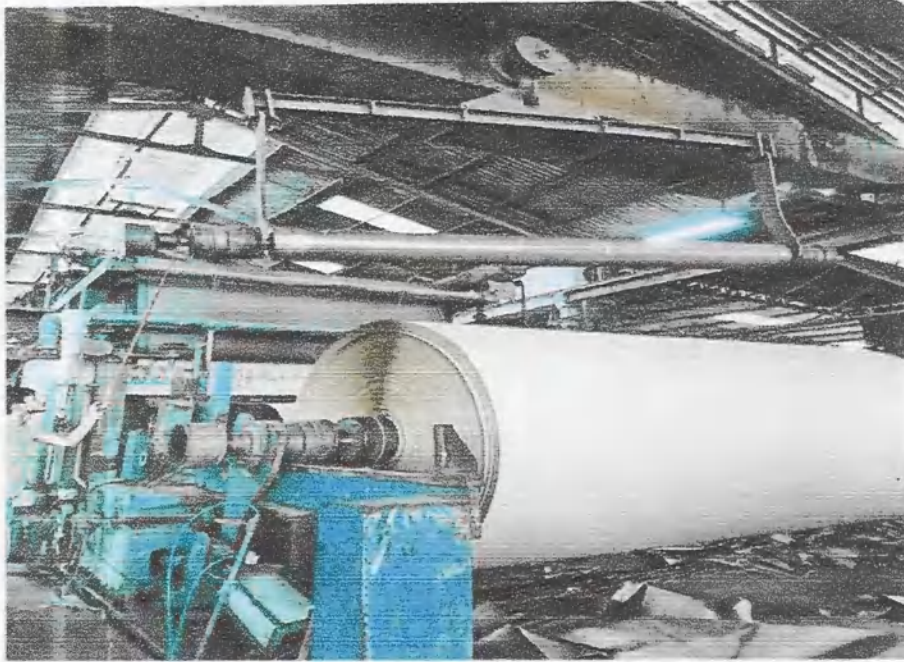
Paper Machine 1 at Meenu Paper Mills Private Ltd
